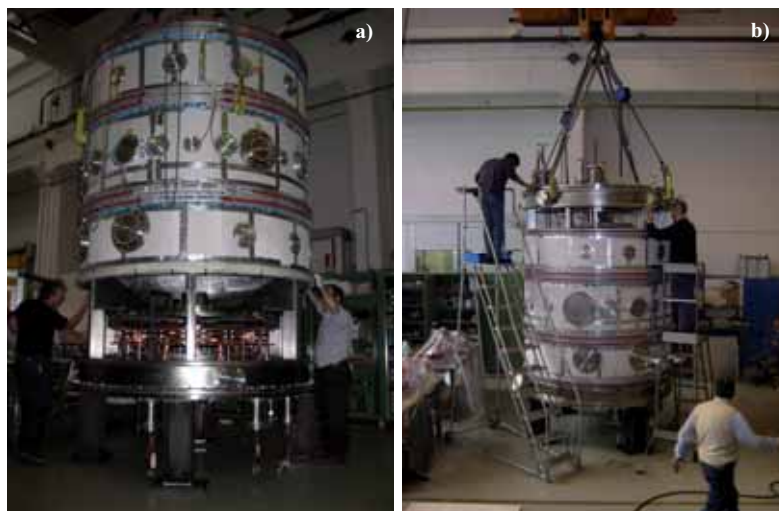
The cathode group: a) during assembly; b) inside the vacuum vessel
